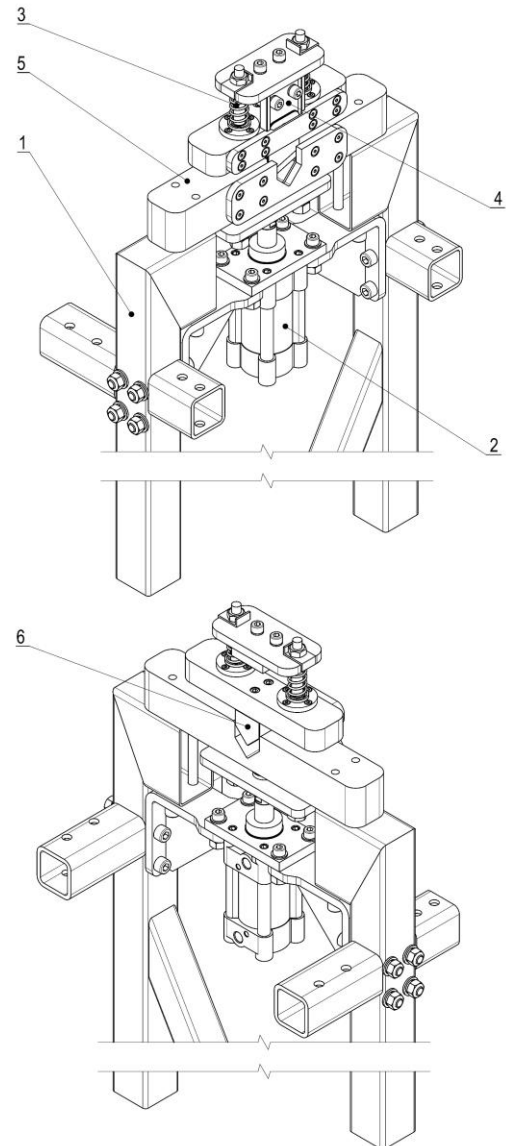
Shear cutter assembly: 1 – frame, 2 – air cylinder, 3 – guide, 4 – cutting sub-assembly, 5 – die, 6 – hold-down device
